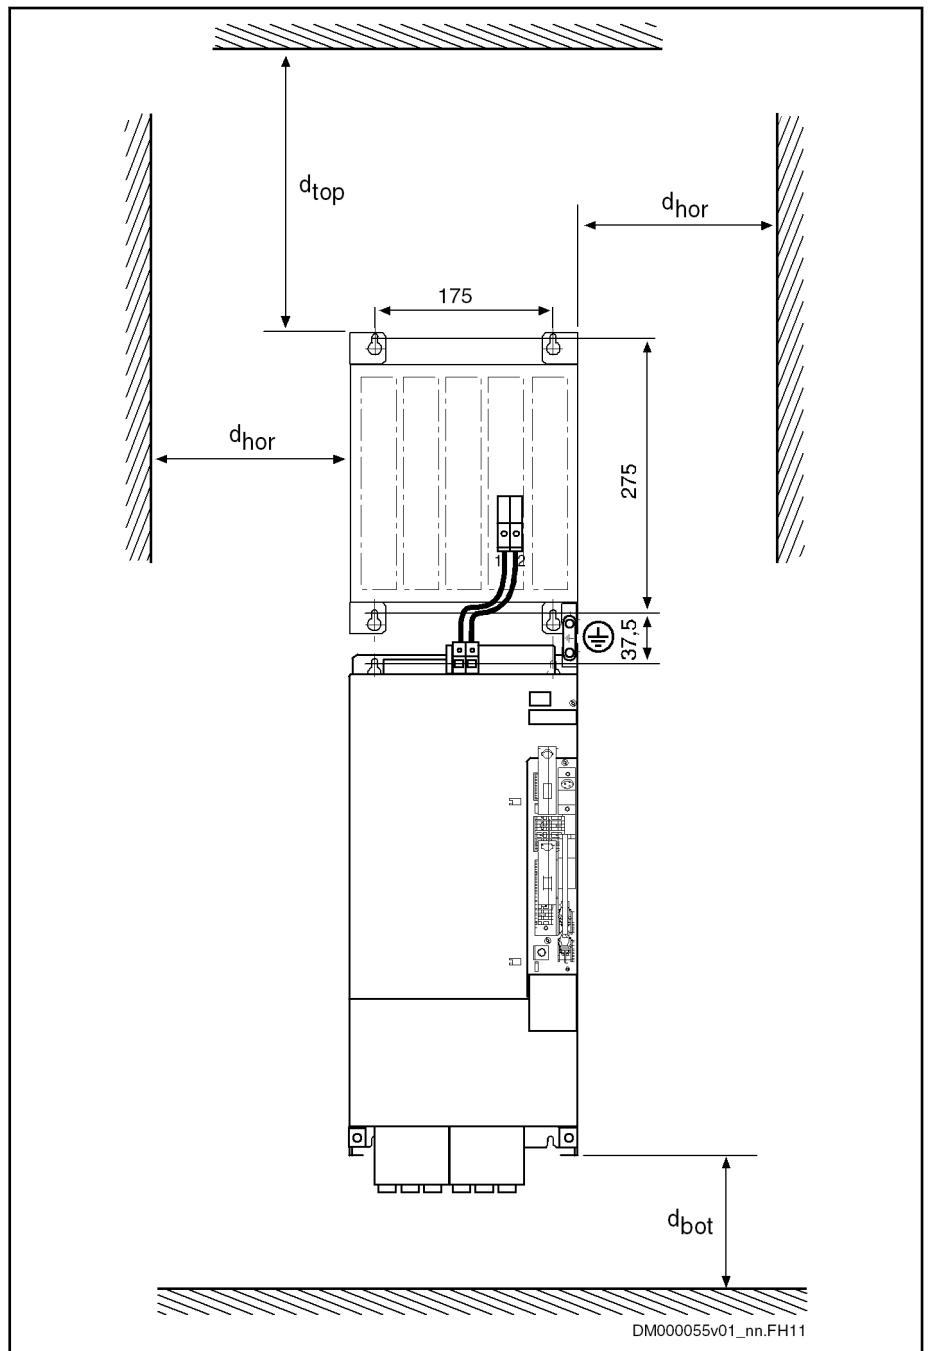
Dimensions Braking Resistor HLR01.1N-0300-N17R5-A-007-NNNN
